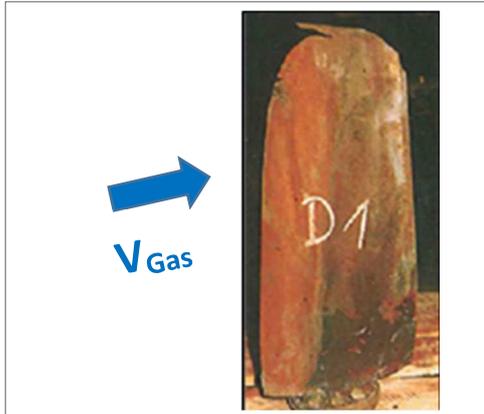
Destruction of a centrifugal fan impeller blade close to a welding seam by particle flow erosion
